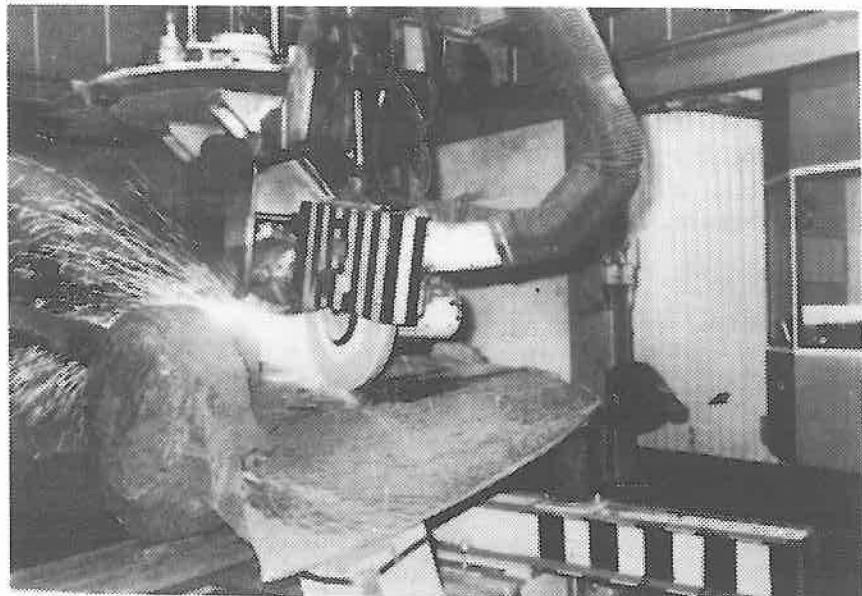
Grinding of turbine blades with the electro-hydraulically controlled manipulator.
